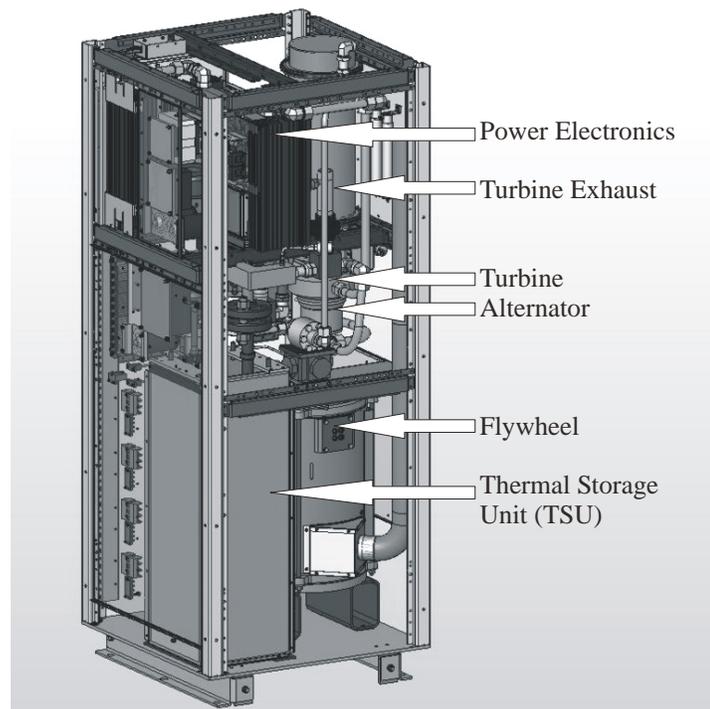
TACAS SYSTEM COMPONENTS (REAR VIEW)
